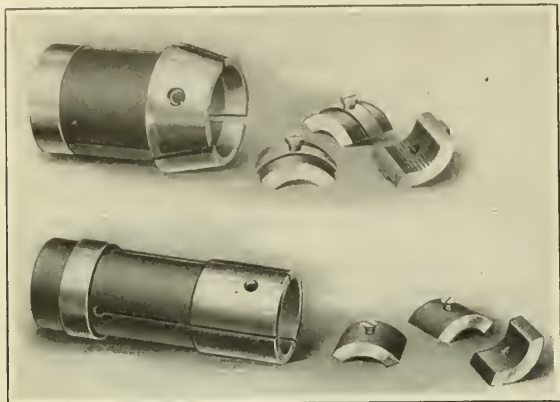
Master Spring Chuck and Feed Chuck with Gripping Jaws removed
